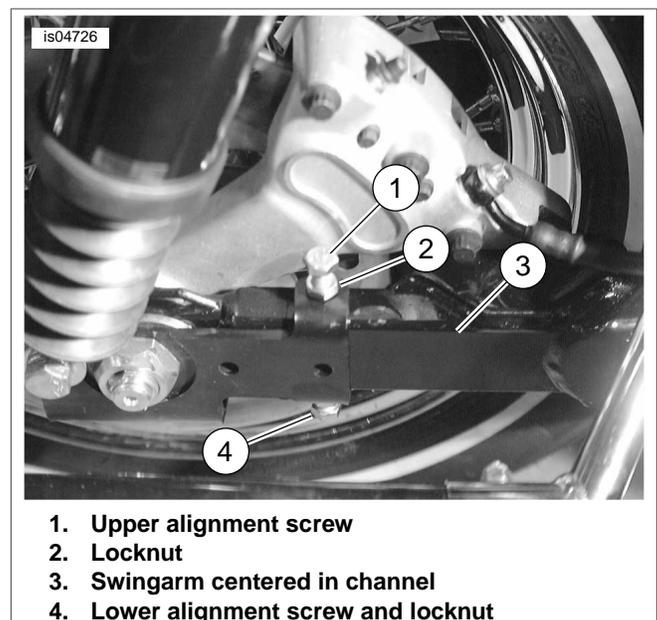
Install Bracket Alignment Screws (2007 and Earlier Shown)
